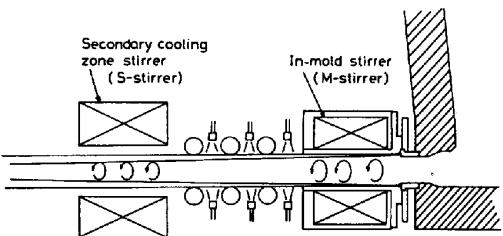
Schematic representation of in-mold and secondary cooling zone stirring
